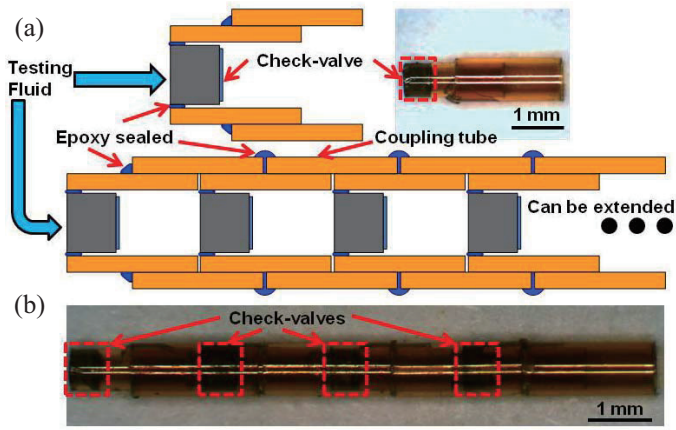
Valve packaging. (a) single valve packaged in capillary tubes and (b) 4 individual modules are integrated using coupling tubes.
